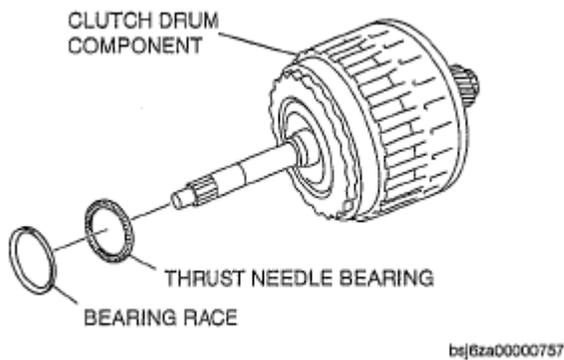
Identifying Thrust Needle Bearing And Bearing Race
